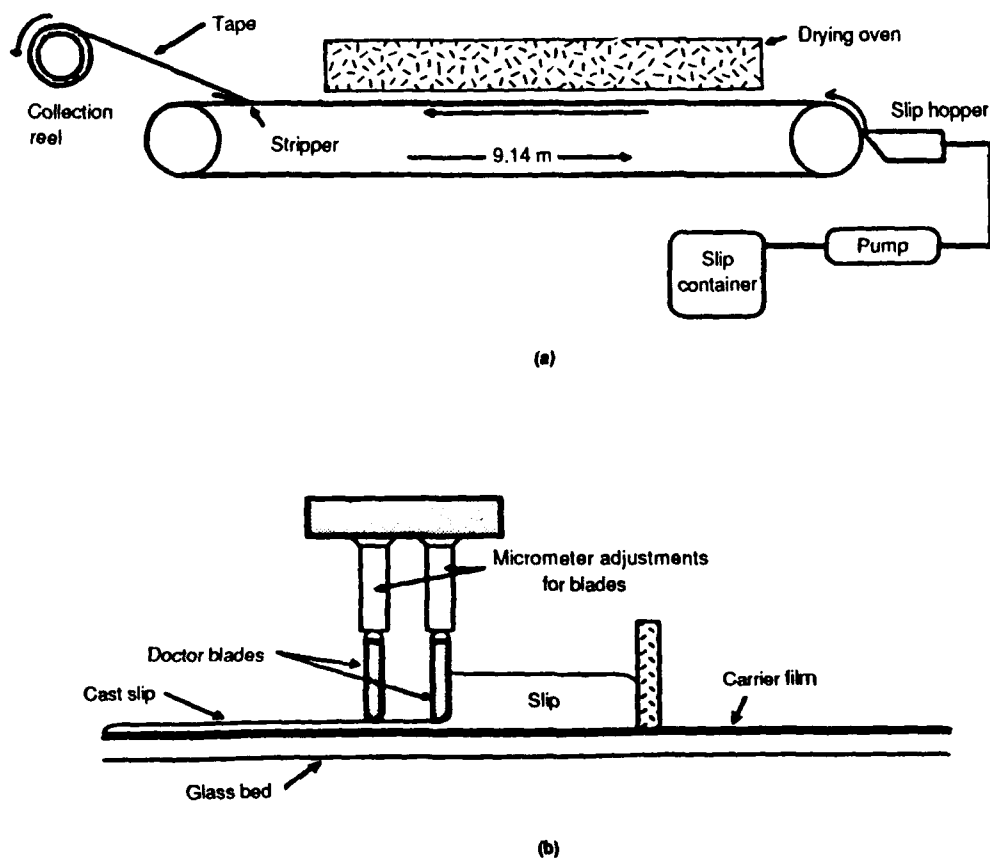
Schematic of methods for MLC manufacturing; (a) belt casting; (b) carrier film casting using a doctor blade.
